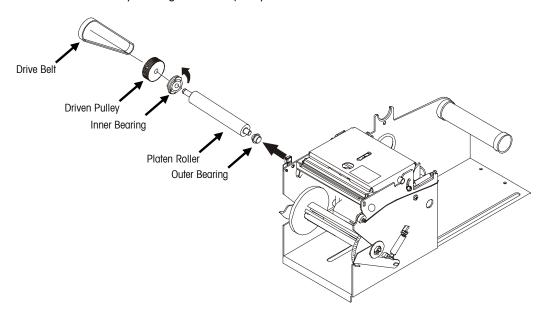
Platen Roller, Belt, and Bearing Replacement
